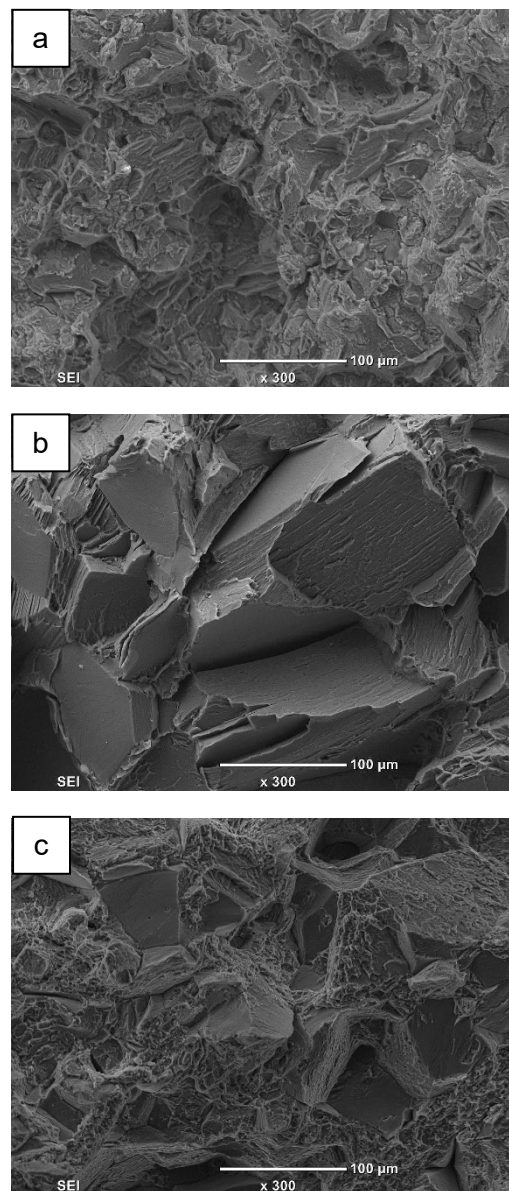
Fracture surfaces following the static tensile strength tests: a) mixed fracture in the non-heat-treated specimen, b) brittle fracture in the solution treated specimen, c) mixed fracture in the solution treated and aged specimen.
